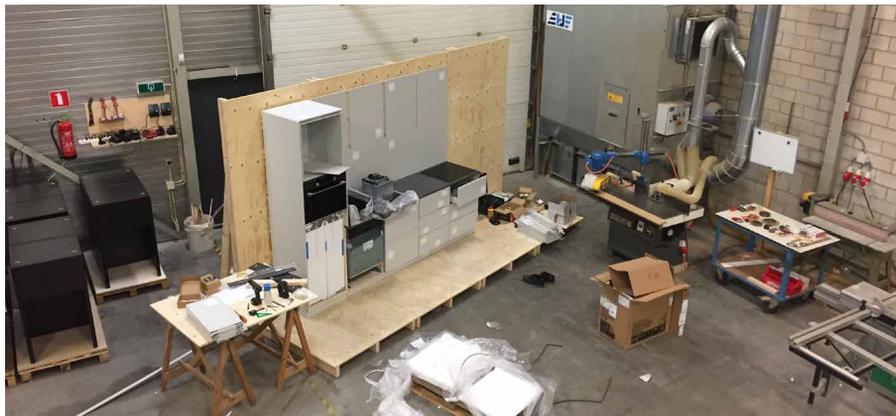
CIK prototype 1 being assembled with a grey style package
